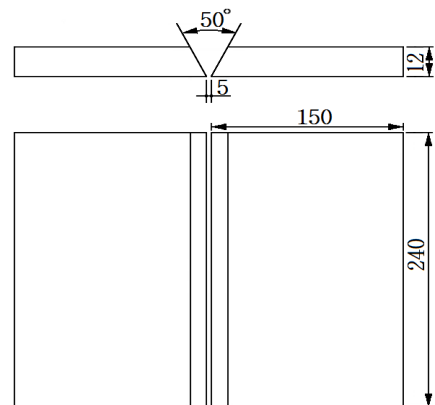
Nonrestraint welding condition welding specimen
